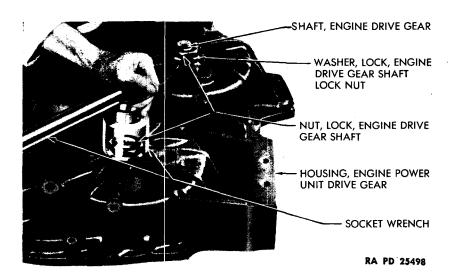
Tightening Engine Drive Gear Shaft Lock Nut
